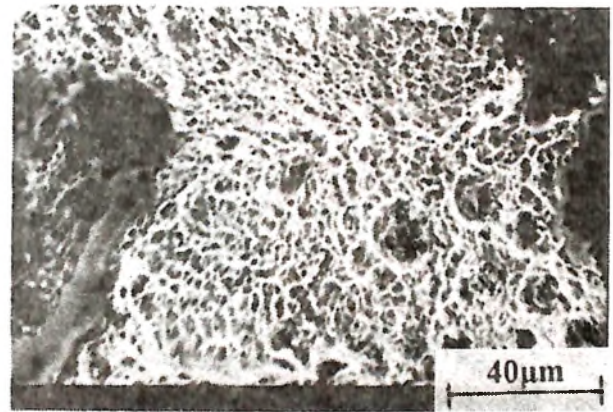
(b) Fracture surface of weld (shallow & smaller dimples).
